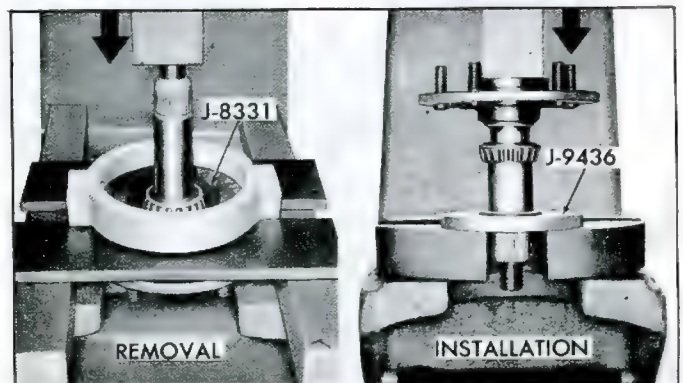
Removing and Installing Drive Spindle Outer Bearing
